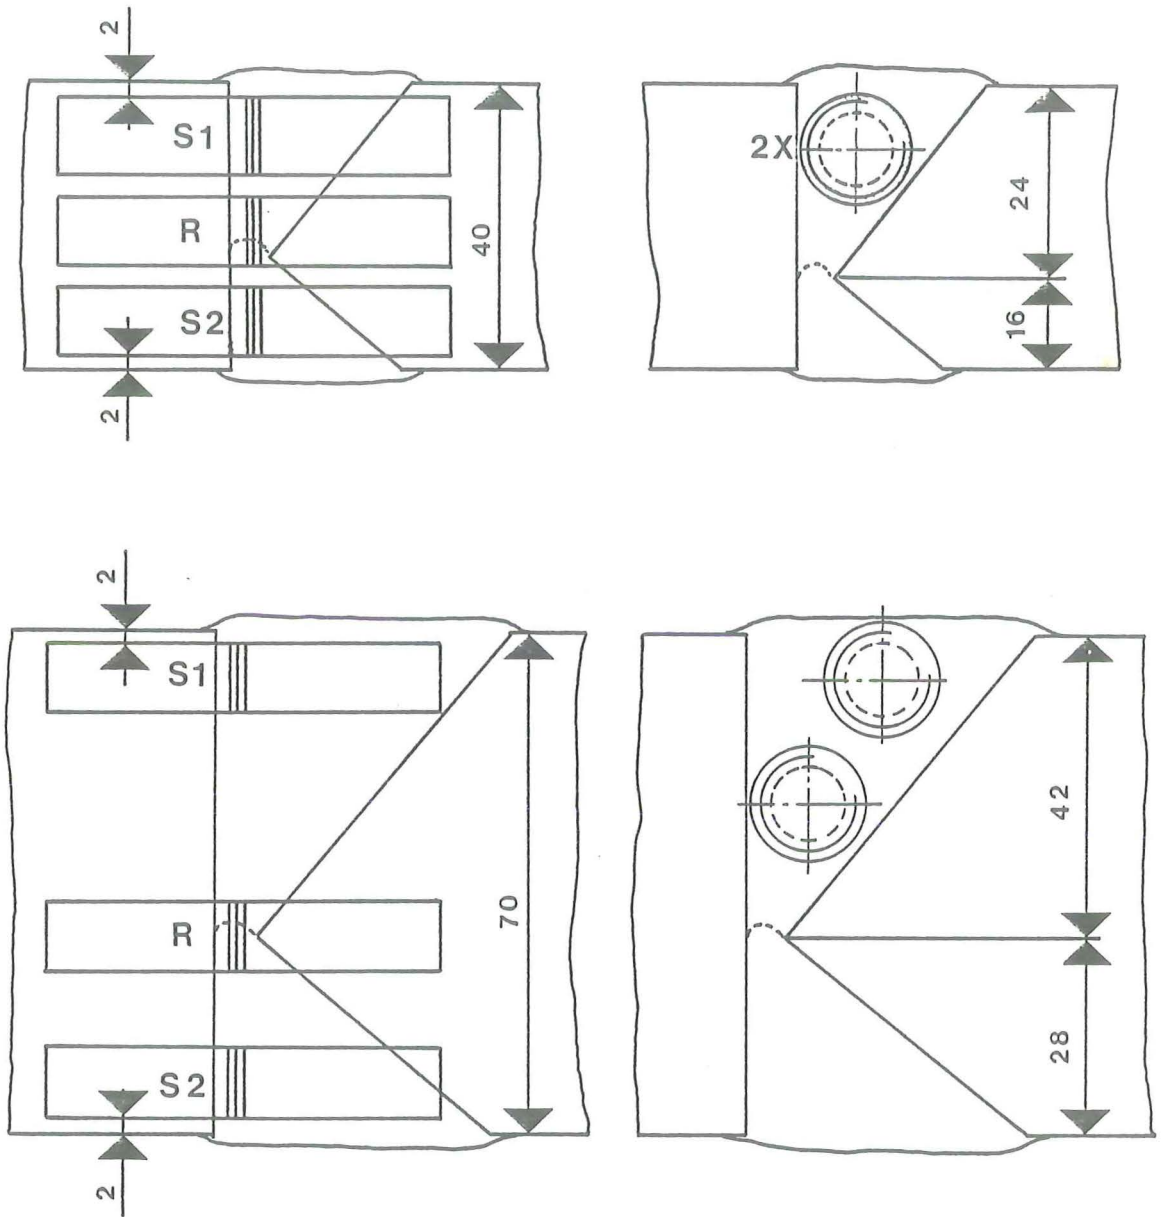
Position of the Charpy-V specimens and the tensile bars in weld metal.
